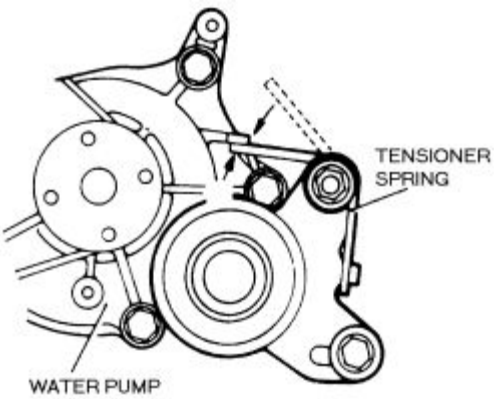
Install the lower end of the tensioner spring first, then attach to the water pump
